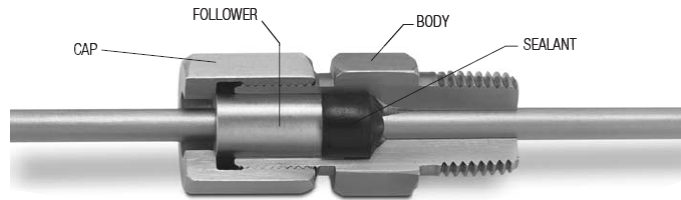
Cutaway view of Conax[®] feed-through assembly.
